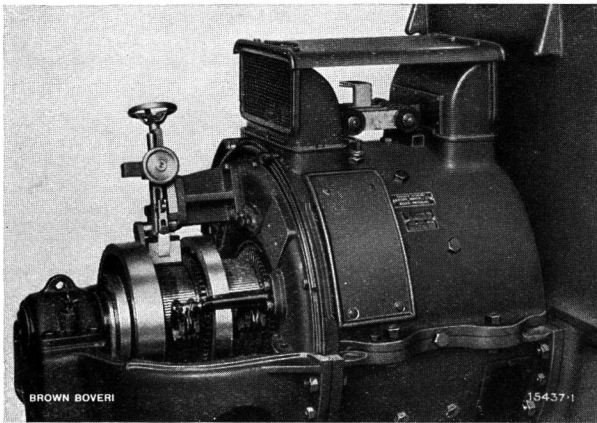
Commutator grinder fitted to the direct-current motor driving a centrifugal scavenging blower.
